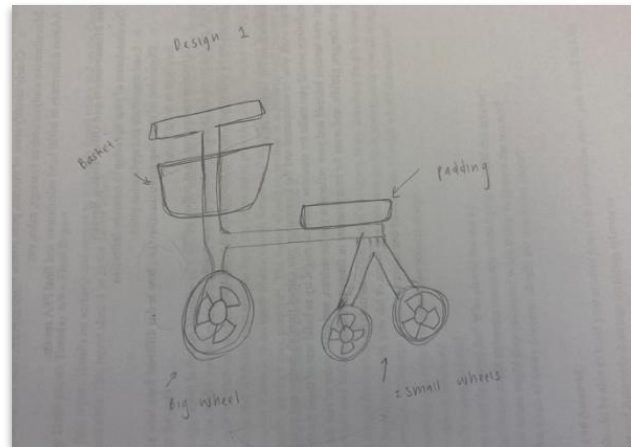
Iteration #1 of Scooter Design. Concept sketch of design #1, showing a three-wheel configuration with one large front wheel and two smaller rear wheels. The design includes a front handlebar, a storage basket, and a padded rear knee-rest area.
